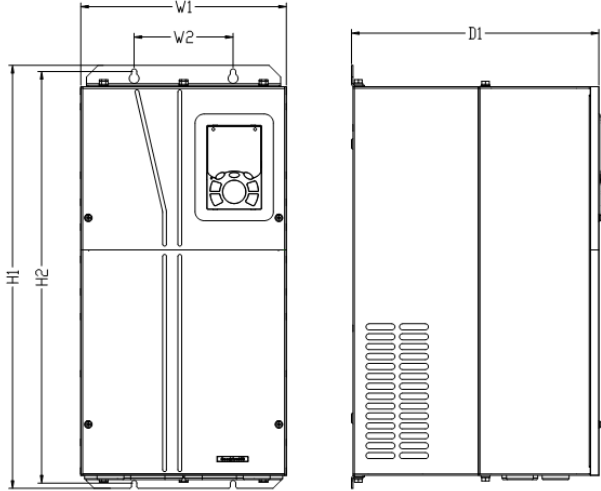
Wall installation diagram of VFDs of 220V 18.5–55kW and 460V 37–55kW
